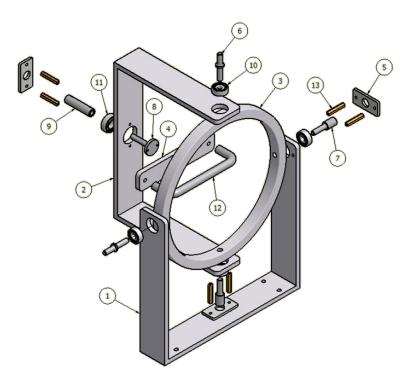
EXPLODED VIEW OF THE PROTOTYPE 3D MODEL.
